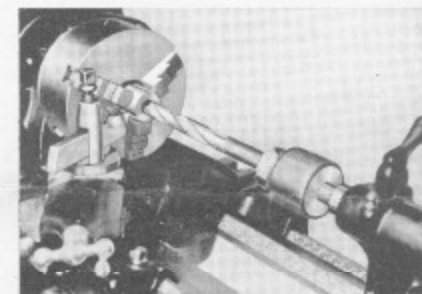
Drilling Hole in Bushing. Drilling of All Kinds can be Done in the Lathe.
